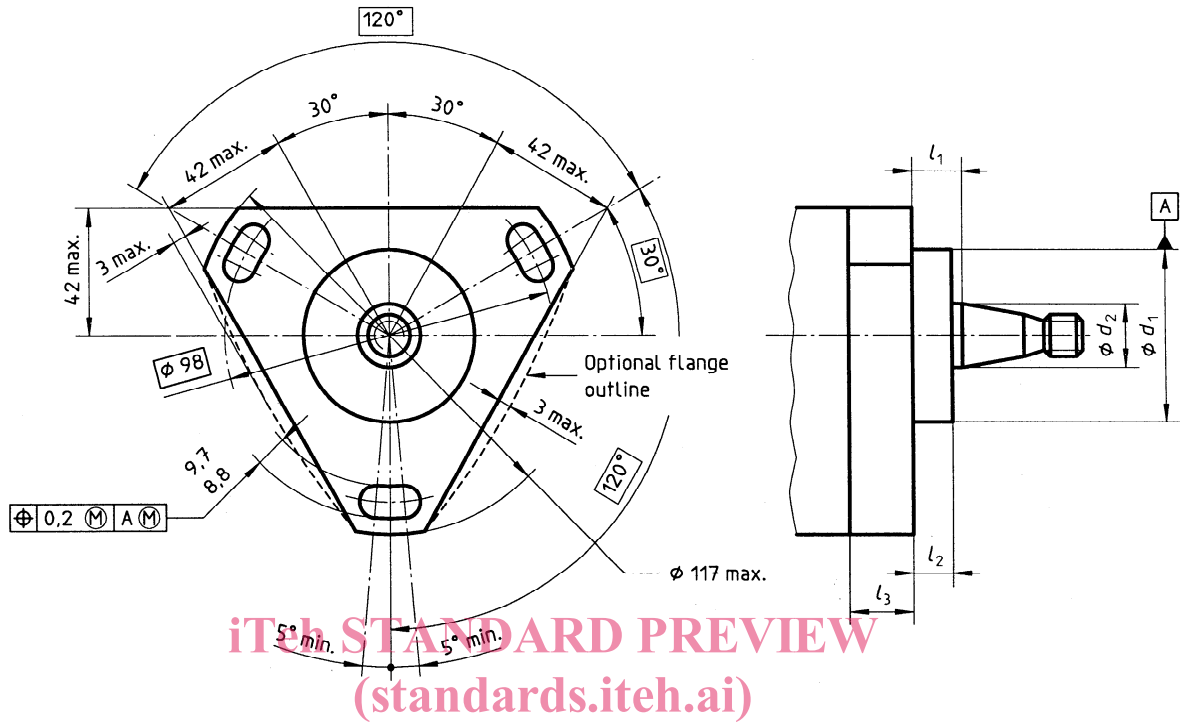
Rotary and distributor fuel injection pumps — Type 2 end-mounting flange
